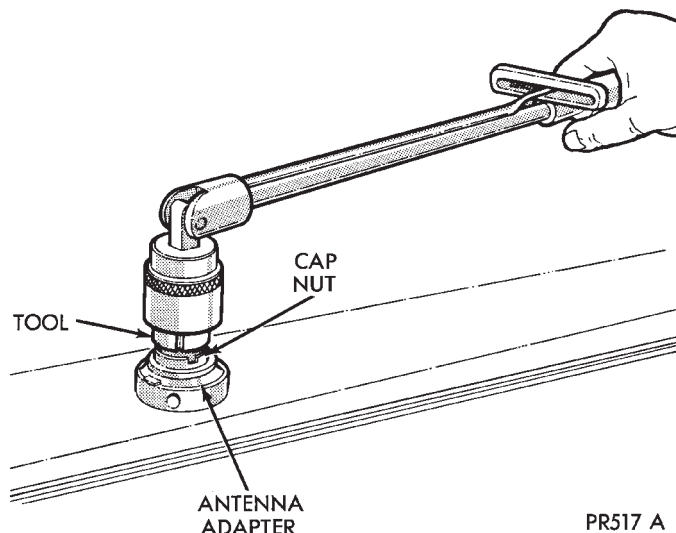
Cap Nut and Adapter Remove/Install - Typical
